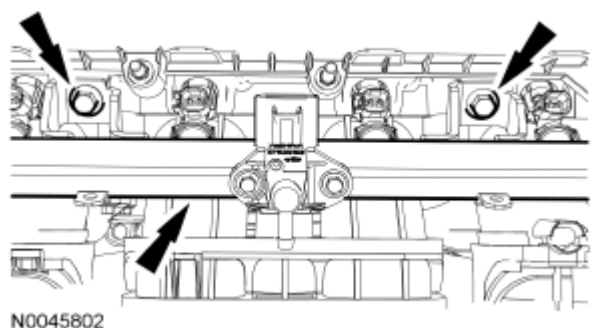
Locating Bolts & Fuel Rail With Fuel Injectors
